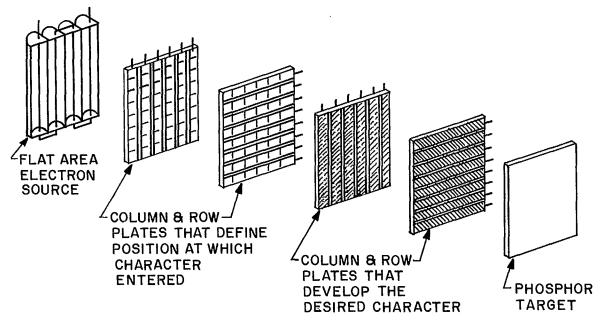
Exploded Schematic View of a Flat Panel CRT Display
